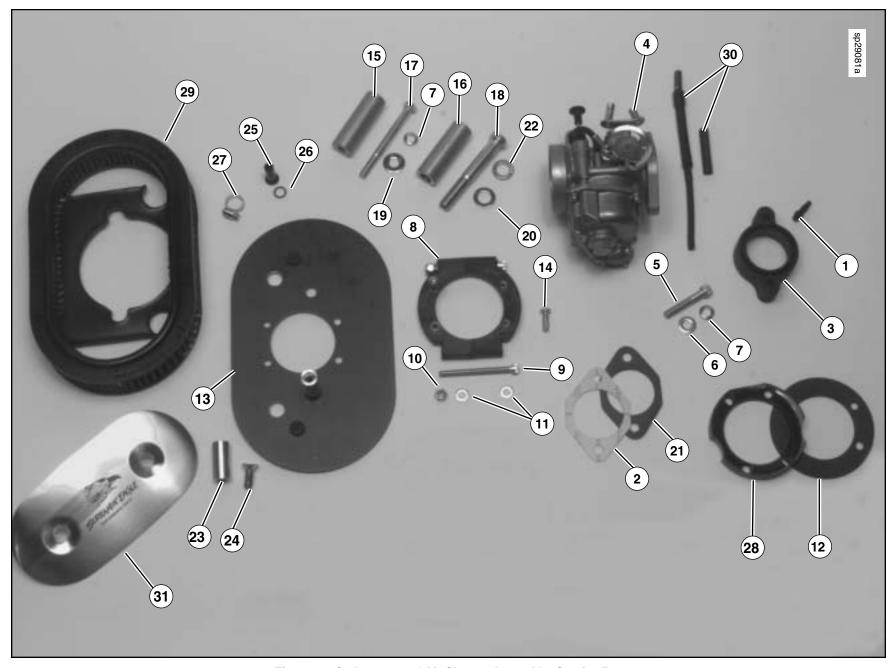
Carburetor and Air Cleaner Assembly- Service Part
